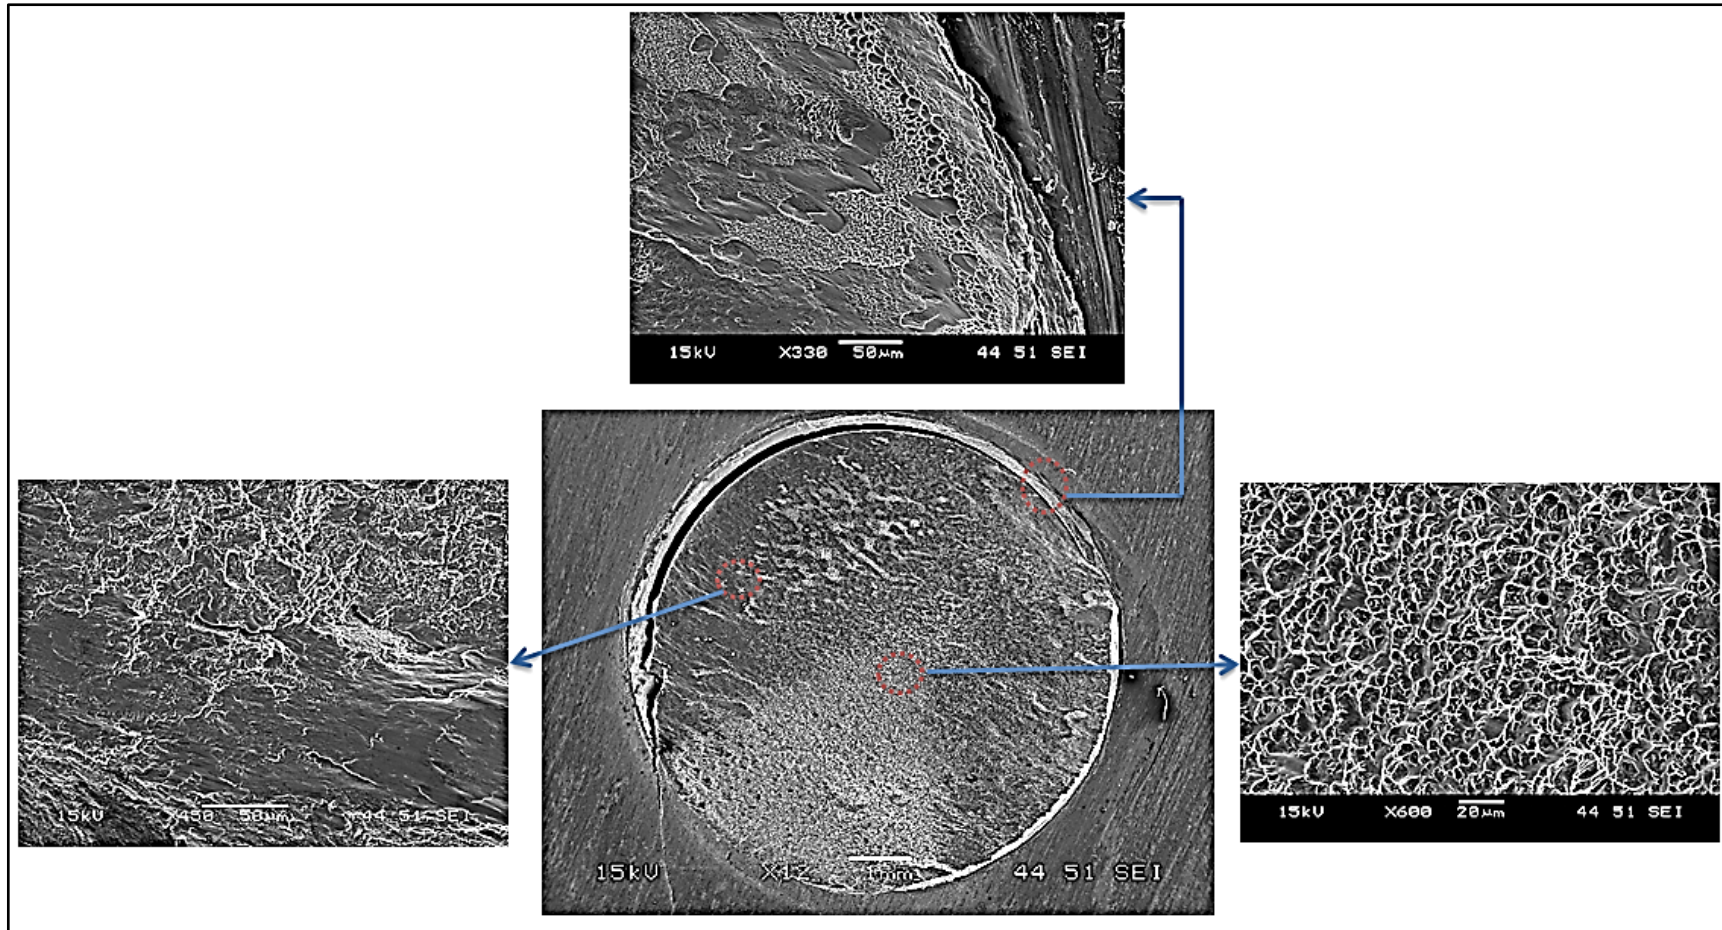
15° bottom hole chamfer fracture surface
